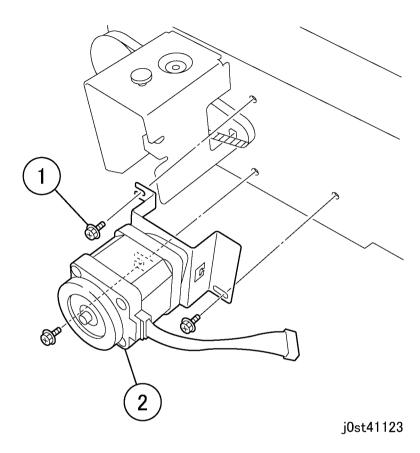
Removing the Carriage Motor Assembly (j0st41123)
